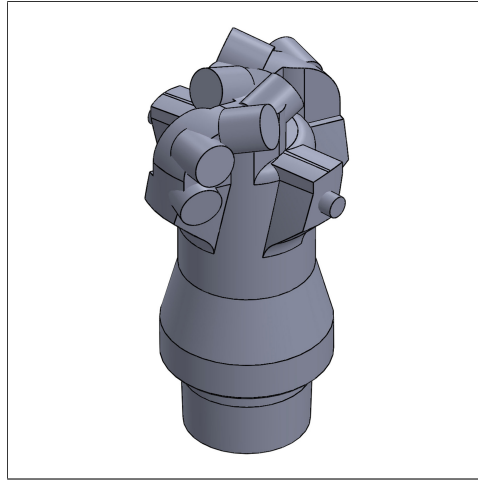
3D model of bit with two blades and two wear pads. Placeholder cylinders represent cutters on the blades and metal inserts on the wear pads.
